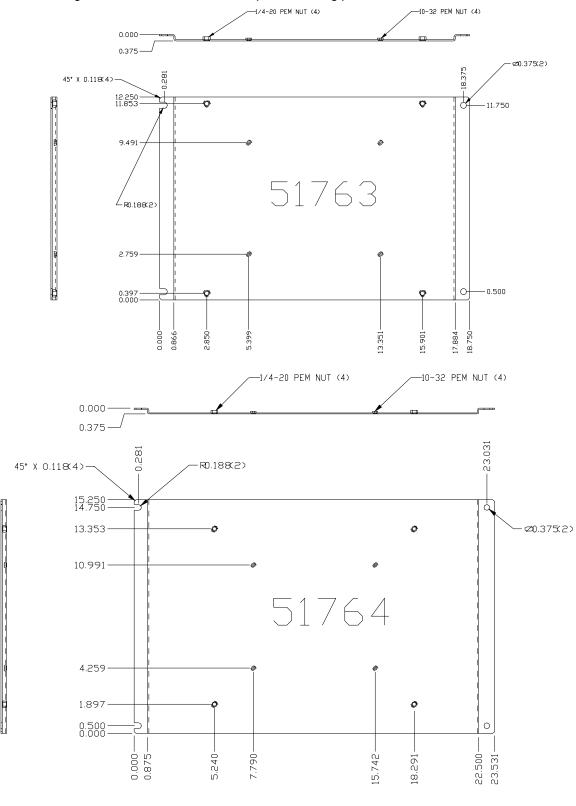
51763 and 51764 adapter mounting plate dimensions.
